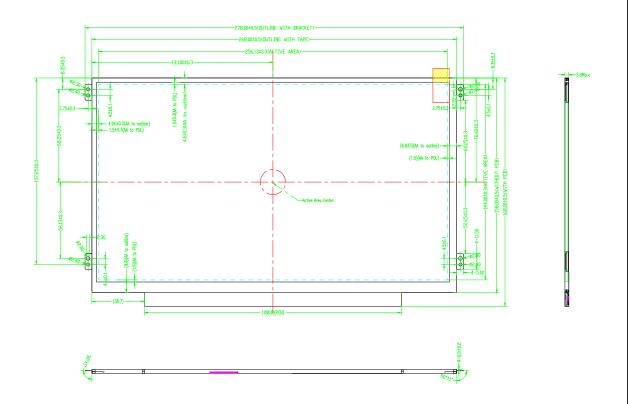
TFT-LCD Module Outline Dimension (Front View)
